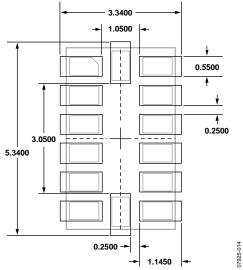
Recommended Printed Wiring Board Land Pattern (Dimensions shown in millimeters)
